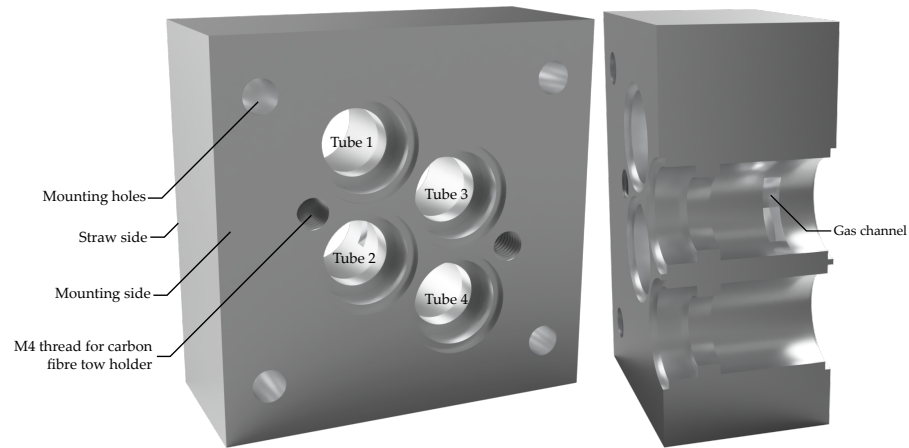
Images of the gas side endplate and of a cut through the endplate. The difference between the gas side endplate and the electrical side endplate are the internal gas channels. The endplates are the core parts of the mechanical construction.
